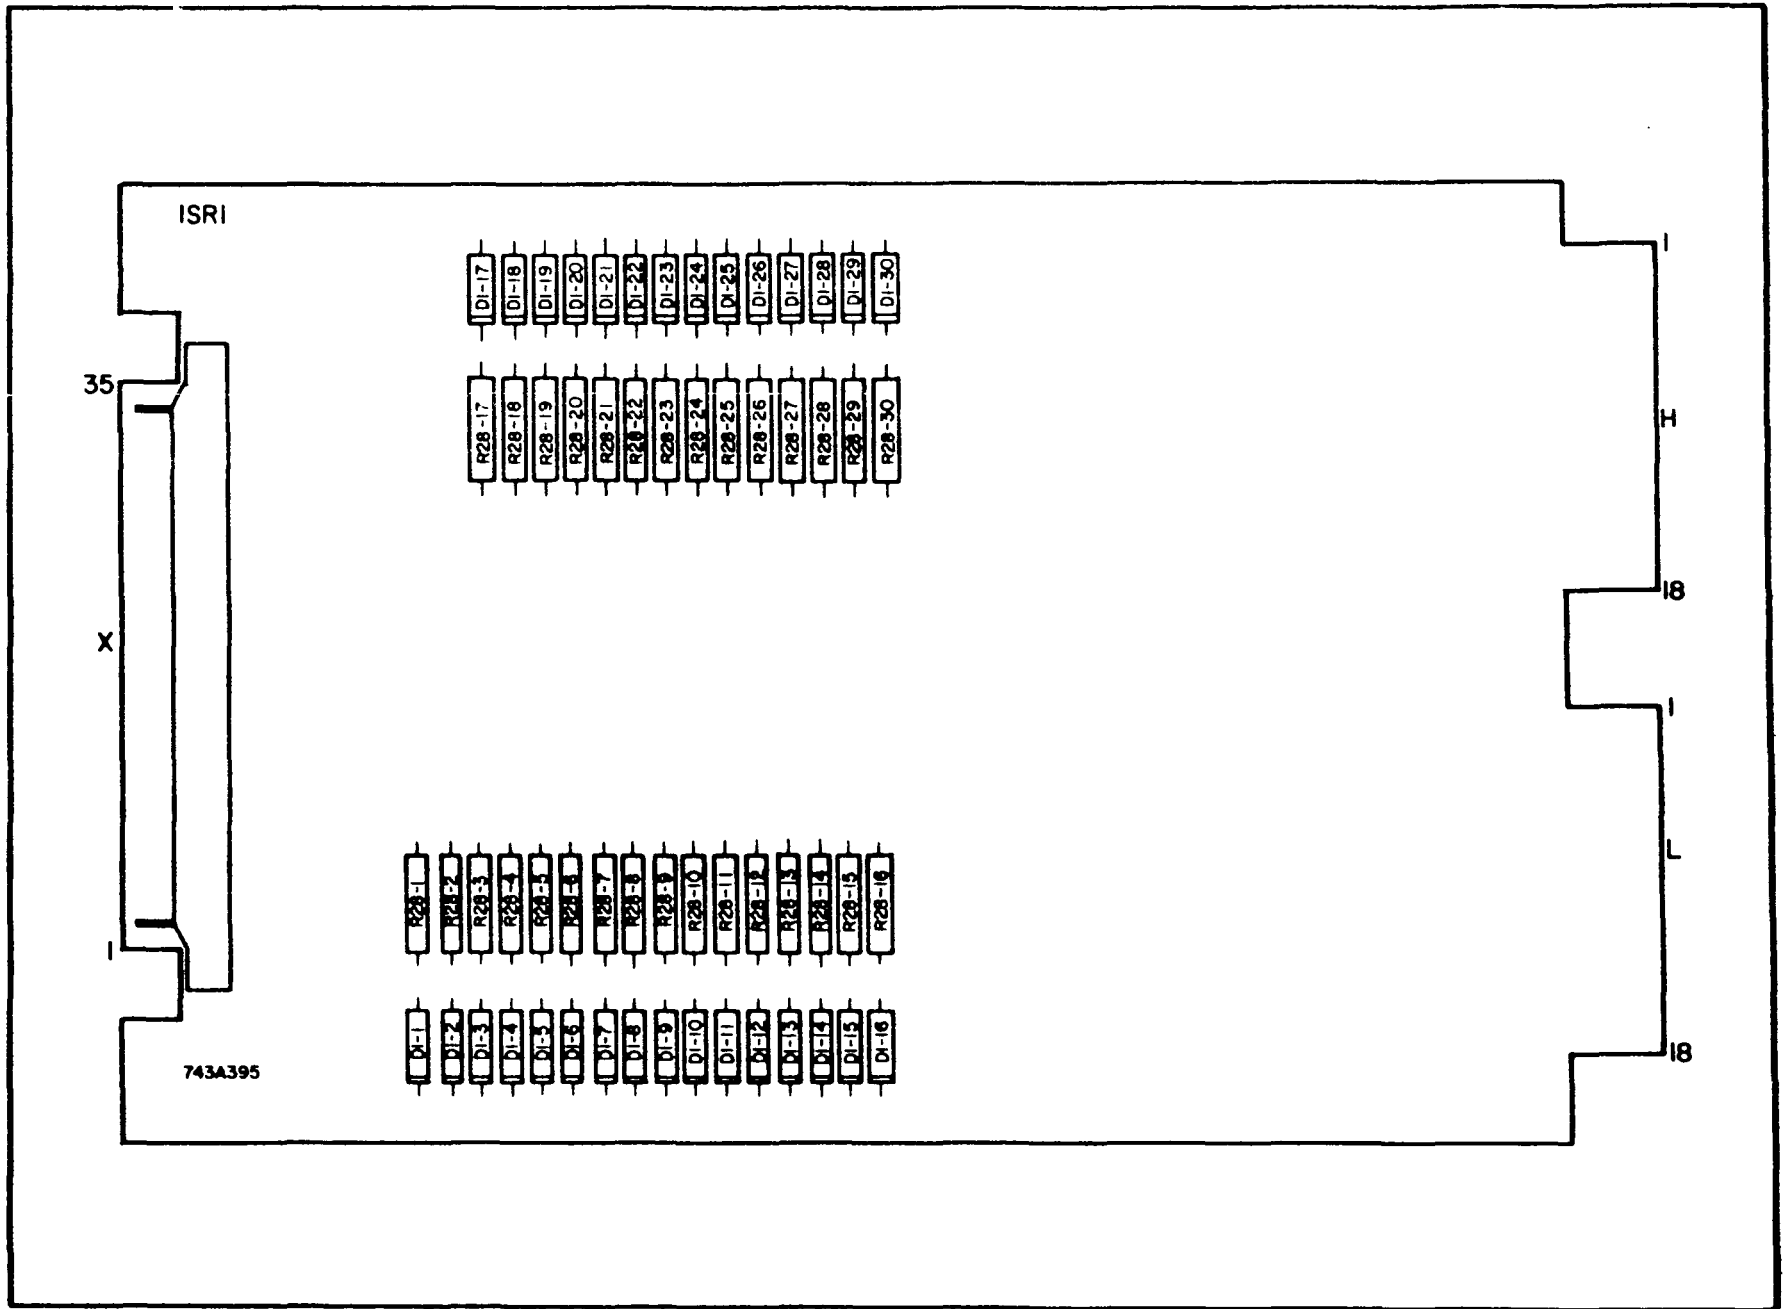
ISRI ASSEMBLY (REF. DWG. 743A395, SUB 1)
